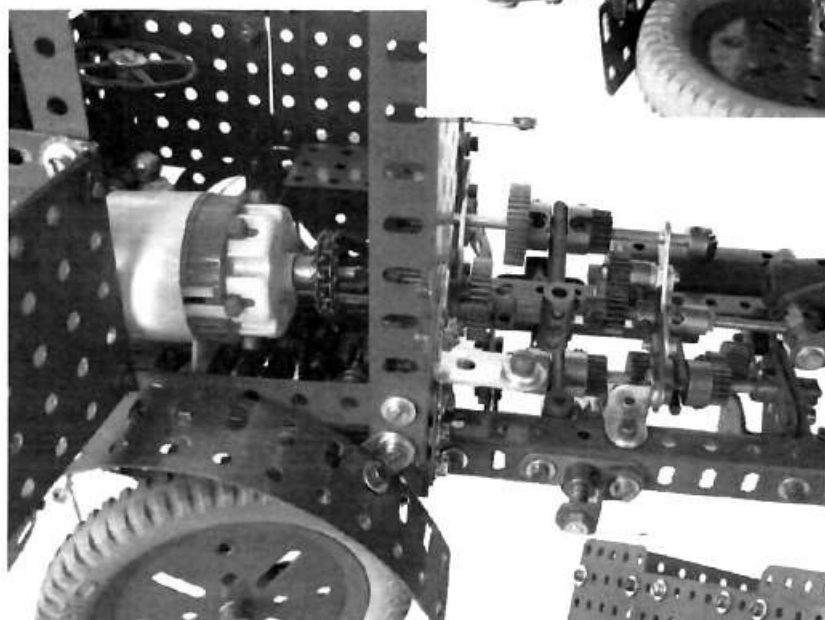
Tipper up and down gearbox from left hand side, main gearbox below.
